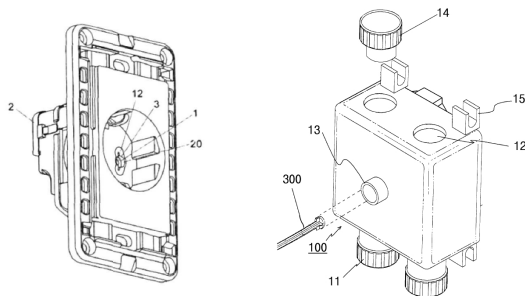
Waterproof electric outlet with silicon packing (left)³⁾ and insulated outlet box with lids (right)⁴⁾
